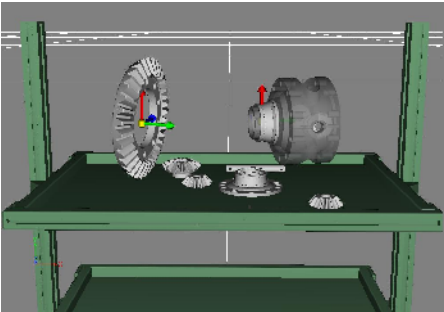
Assembling task of two components: component A is hold using the Wii-mote and B is inserted into A using the haptic device
